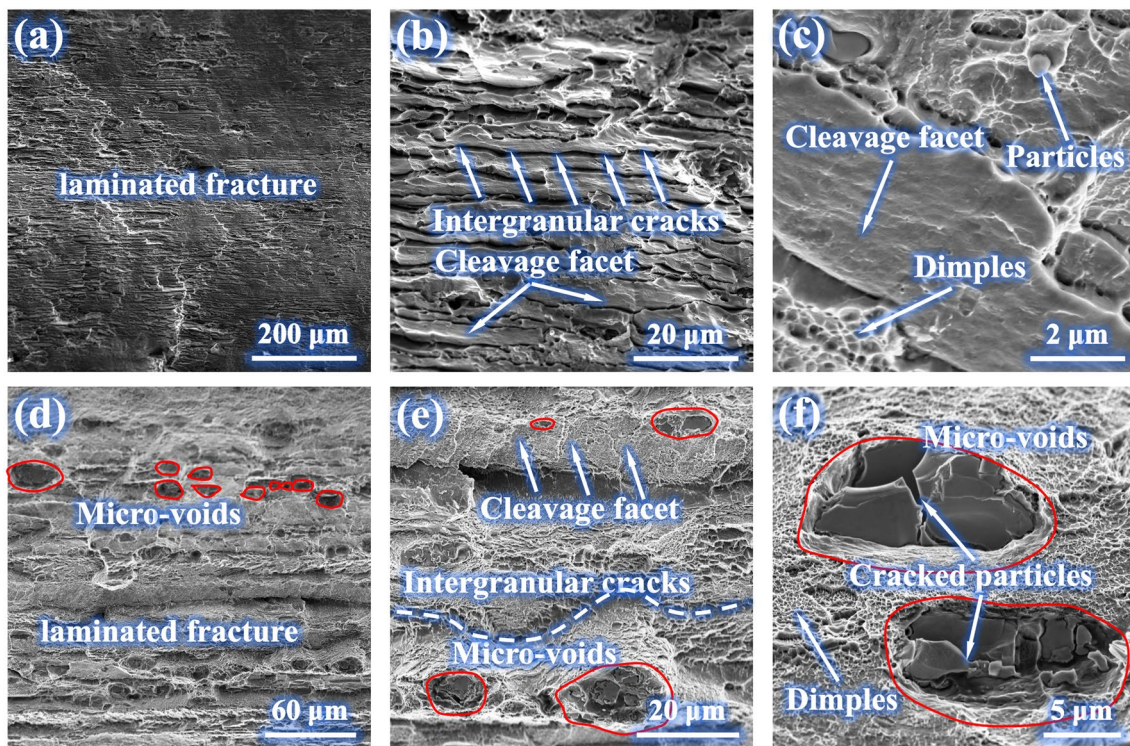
Fracture morphologies of a–c BM and d–f FSW joints
